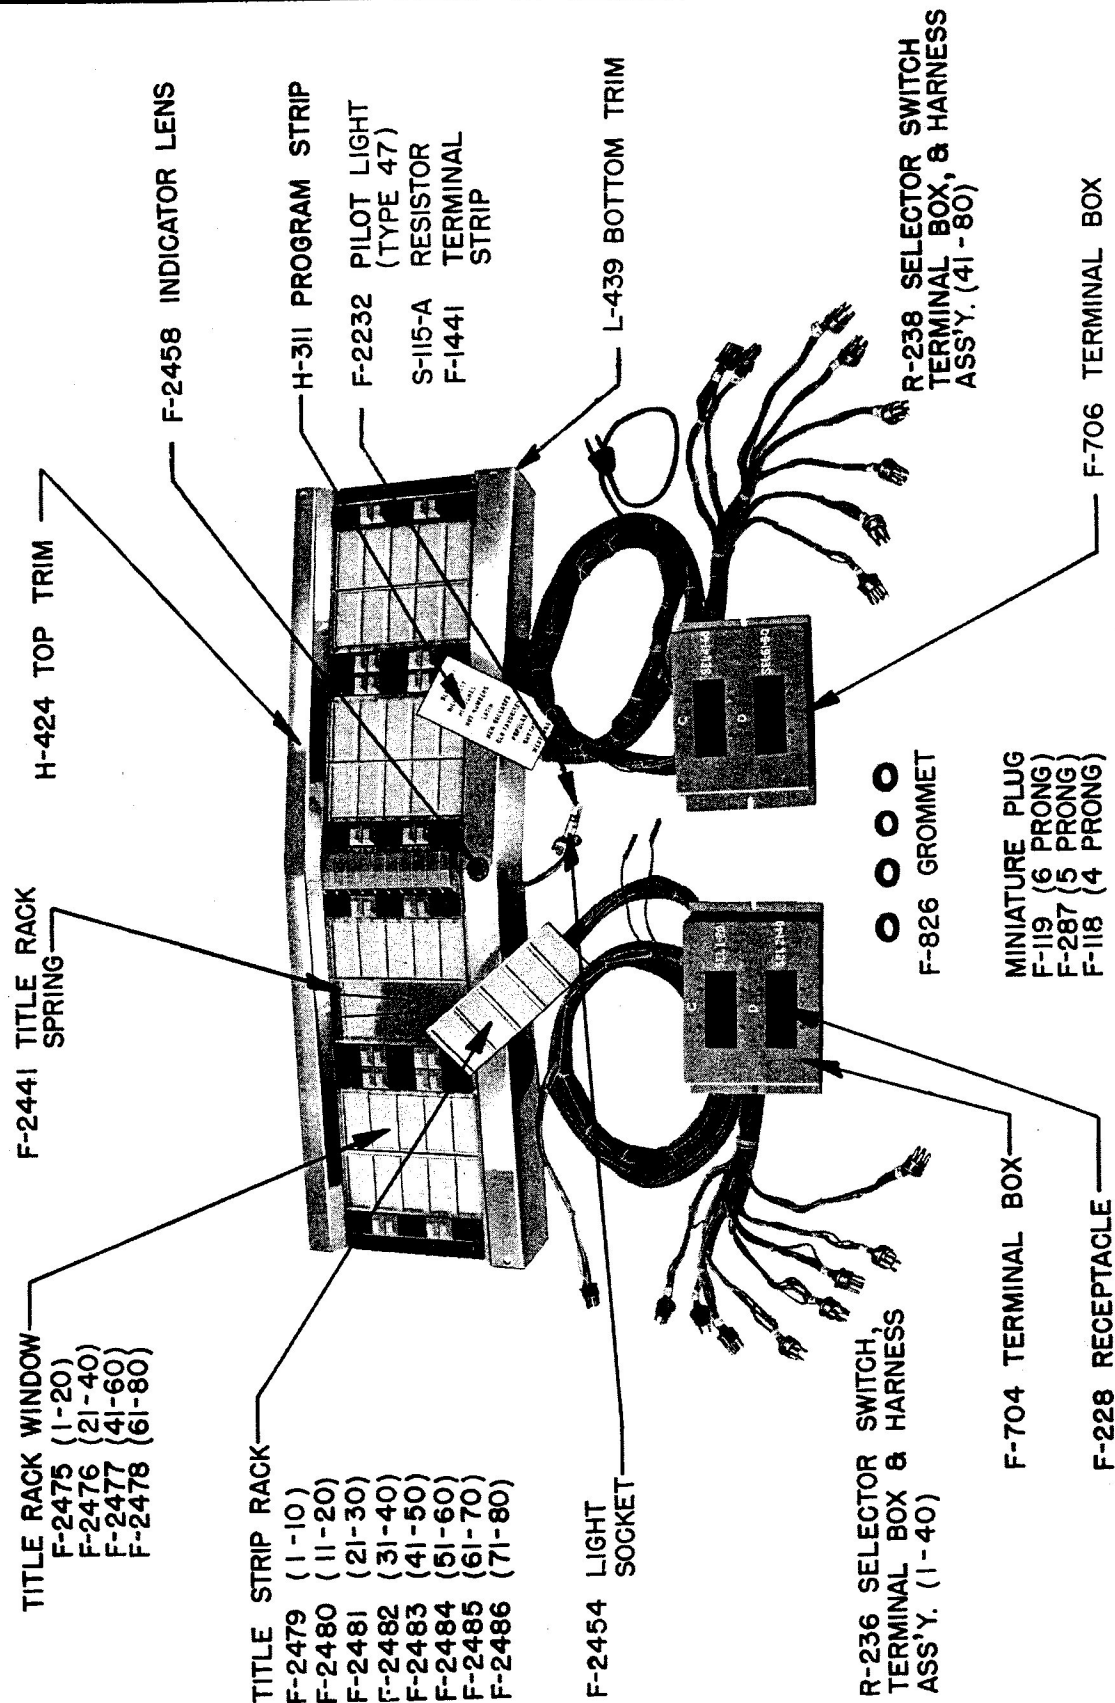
SELECTOR PANEL ASSEMBLY, MODEL E-80
